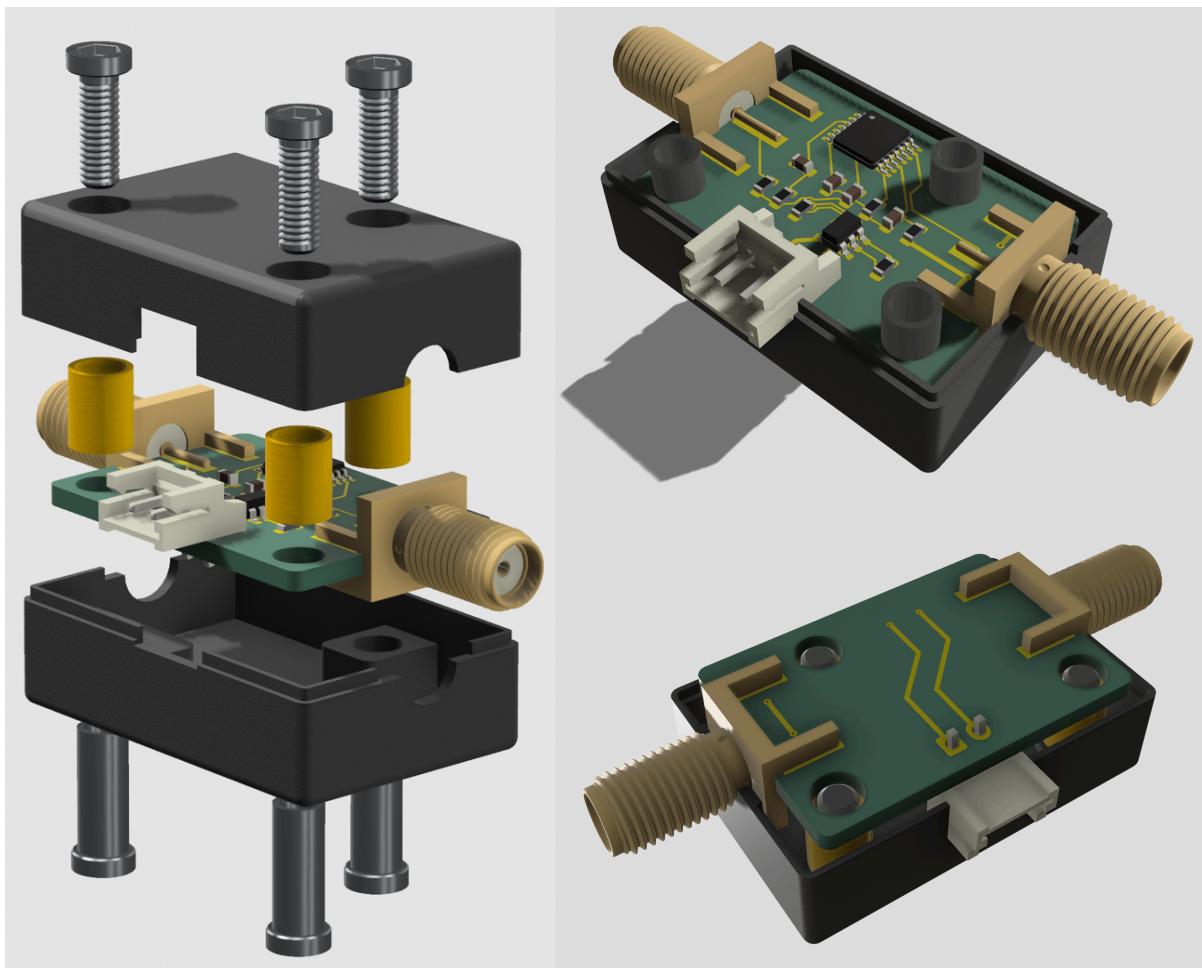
3D model of the entire device in exploded view, with top panel removed, with bottom panel removed. [3]
